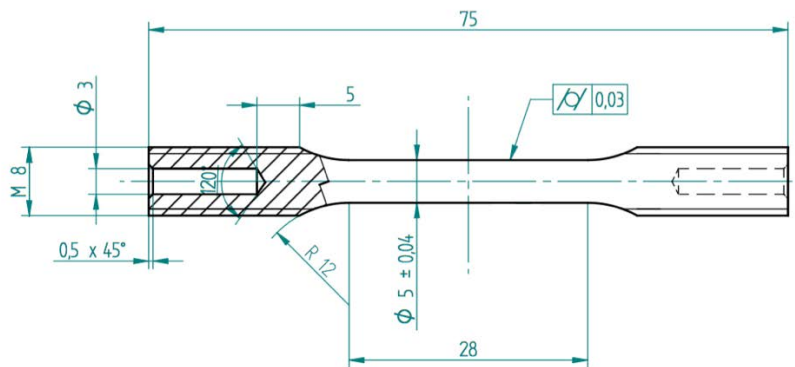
Geometry and dimensions [mm] of tensile specimens.
